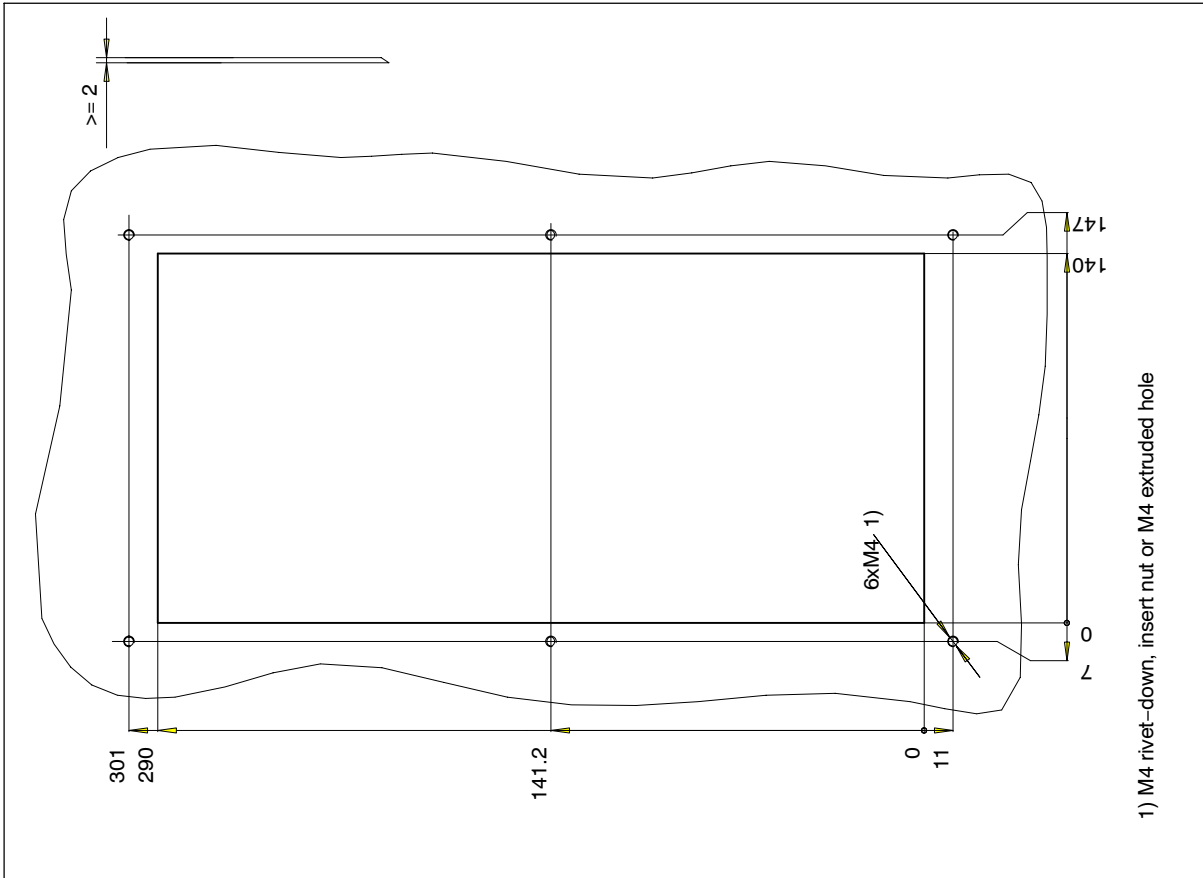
Drilling pattern for the machine control panel (MCP)
